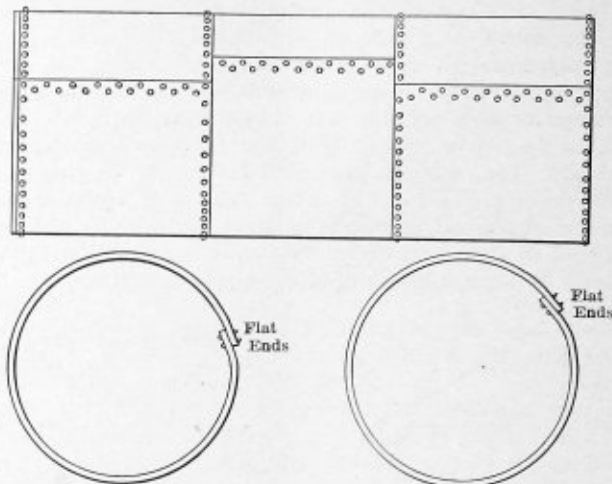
THREE-PLATE TYPE OF BOILER.
